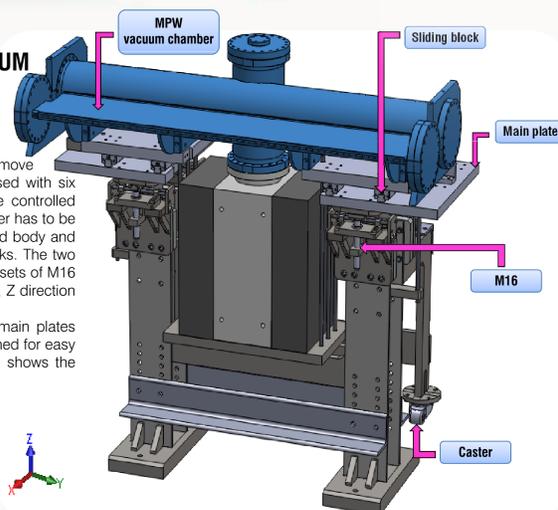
3D CAD drawings of MPW vacuum chamber and its support.
